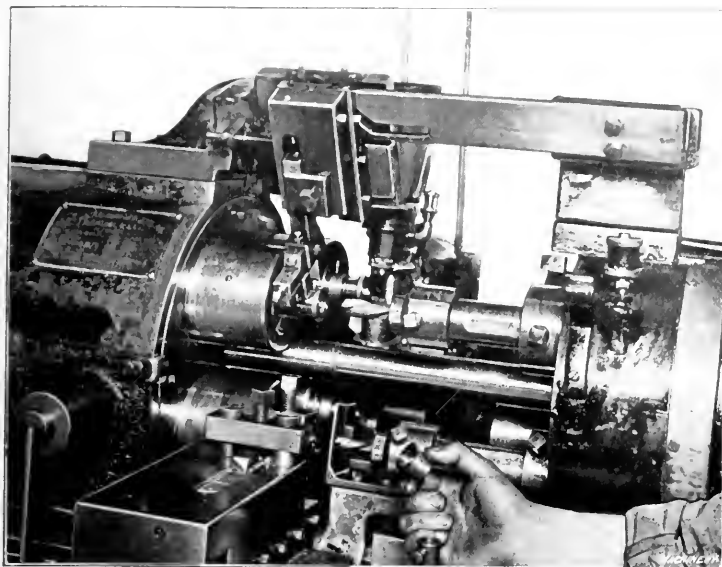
Tool "Set-up" used for producing the Slab-milled Piece shown in Fig. 10
